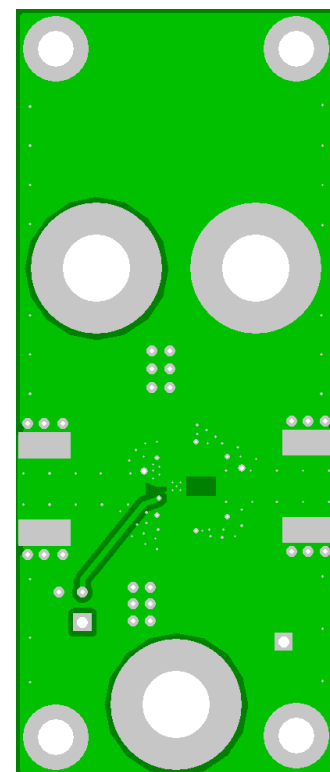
THS4302EVM Board Layout (Bottom Layer)
